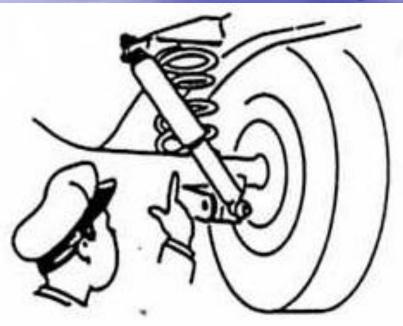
Visual inspection of shock absorber. (Courtesy of Monroe Auto Equipment Co.)
